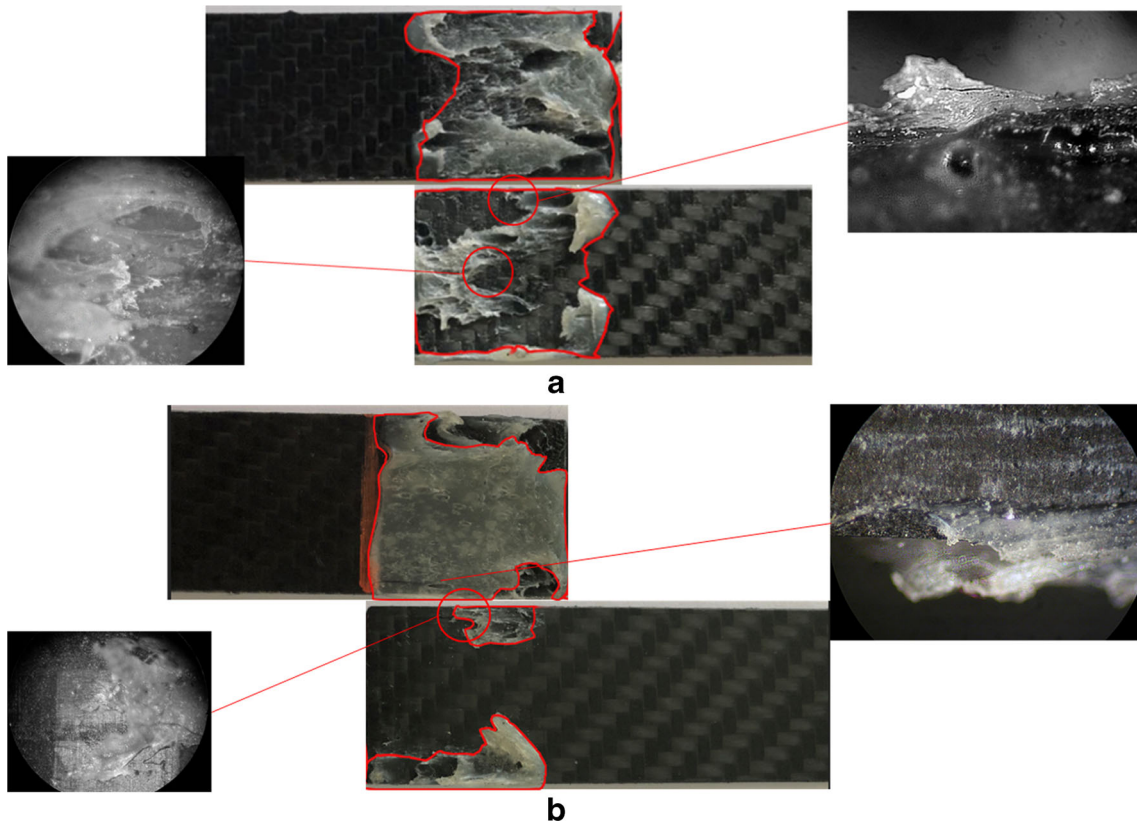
Example of the fracture surface of single lap joint shear test: a cohesive failure, about 88%, and b adhesive failure, about 70%
